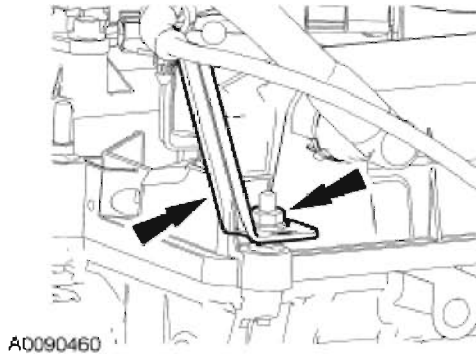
Identifying Accelerator Cable Bracket Bolts
